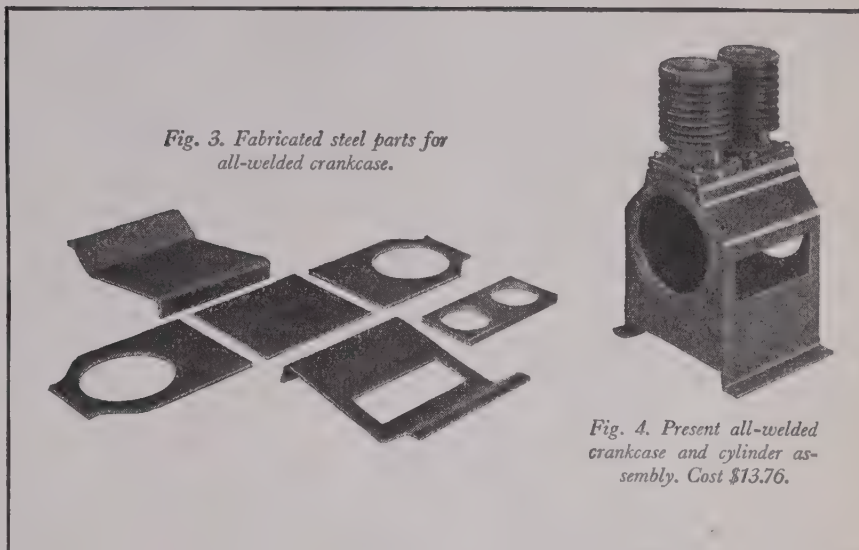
Fabricated steel parts for all-welded crankcase.
